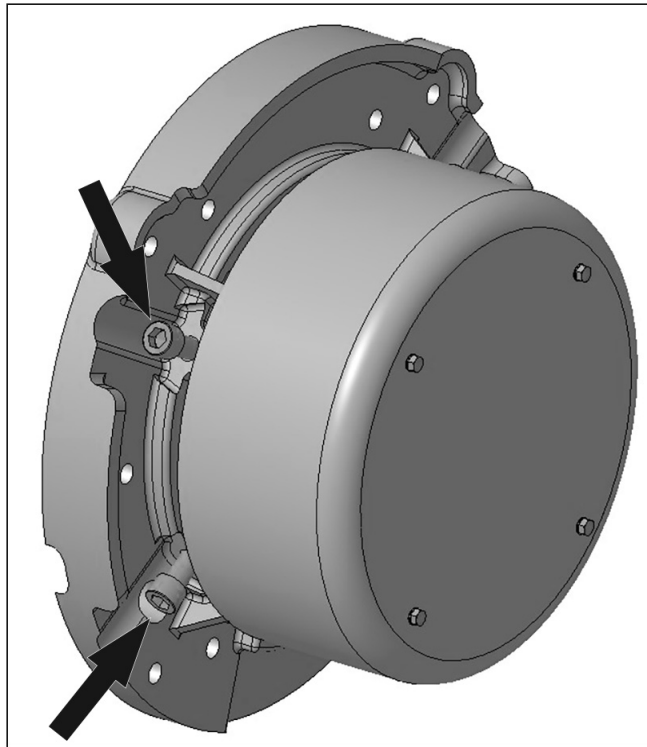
ROTOR TRANSIT SUPPORT SCREWS REMOVAL AND FITTING INSTRUCTIONS
